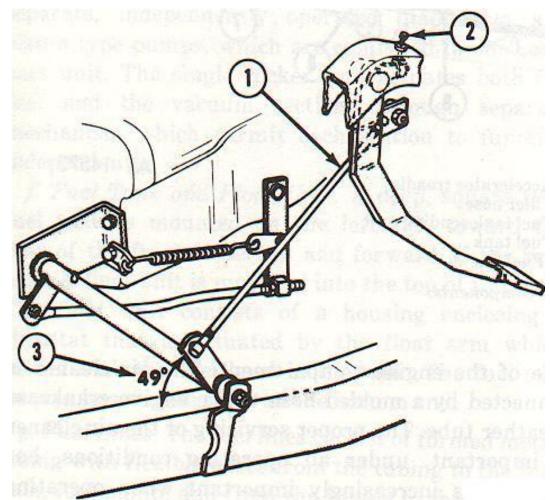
Clutch linkage and clutch pedal adjustments.
